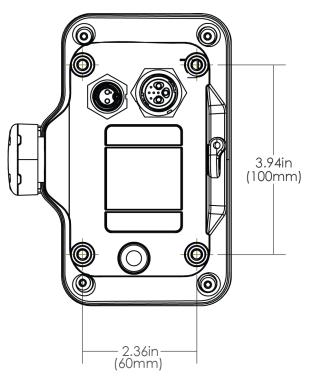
Underside of Throttle Showing Mounting Hole Pattern
